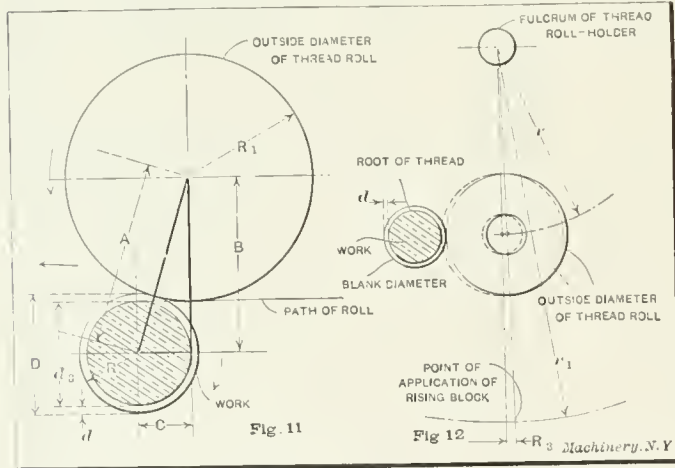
Diagram used in Calculating the Rise on the Cam for Thread Rolling when a Cross-slide Holder is used
